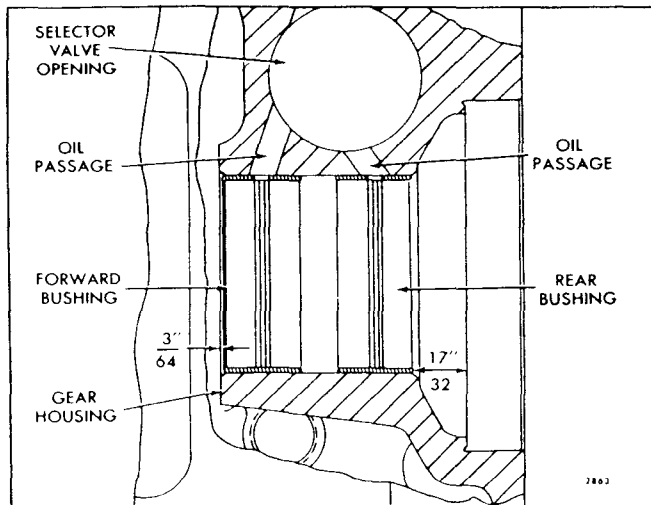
Location of Planetary Gear and Reduction Gear Input Shaft Bushings in Reverse Gear Housing
